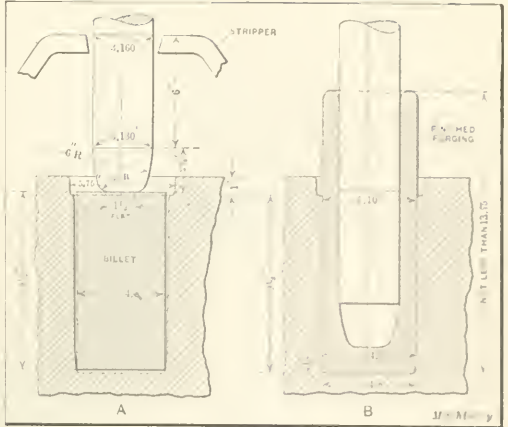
One-operation Method of making 4.5 British High-explosive Shell Forgings
